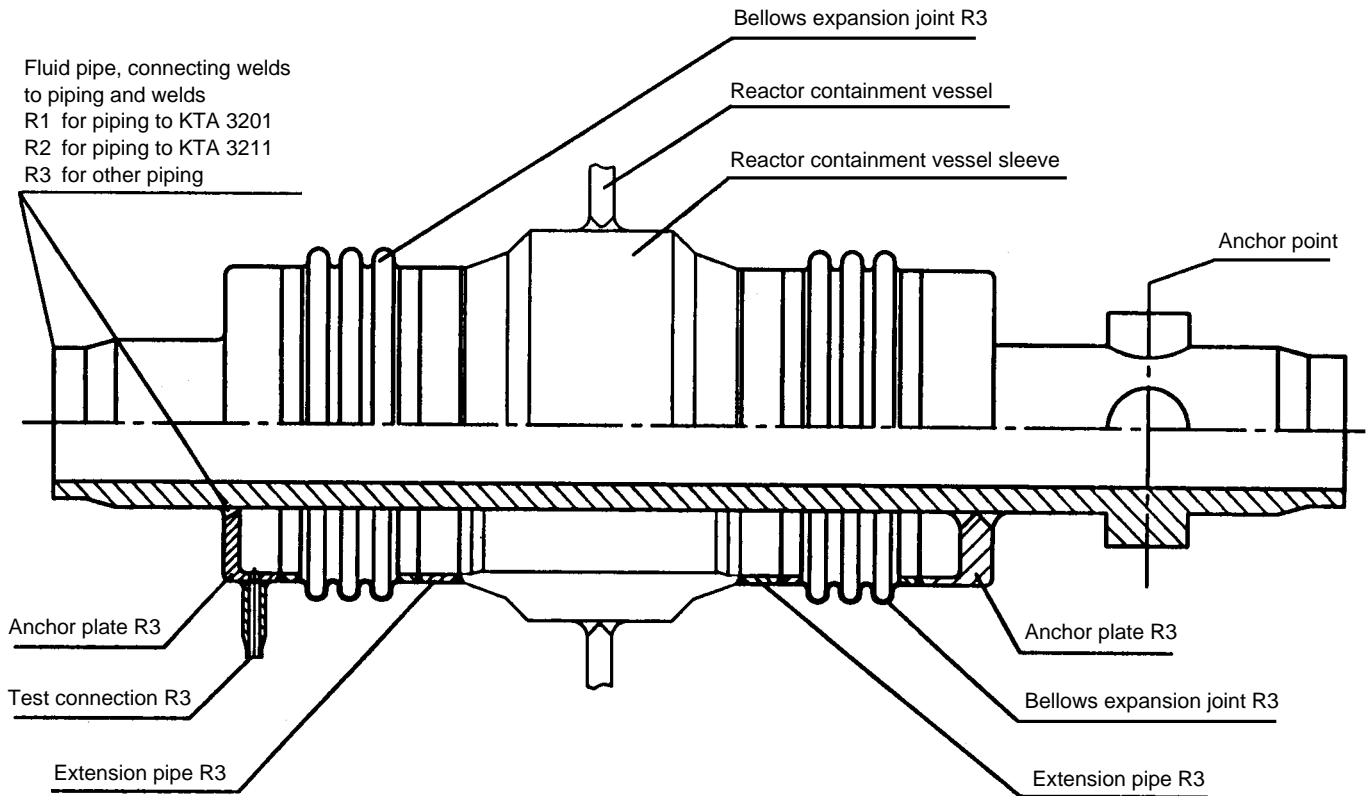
Example of pipe penetration of design type I with several fluid pipes and identification of design loading levels R1, R2 and R3
